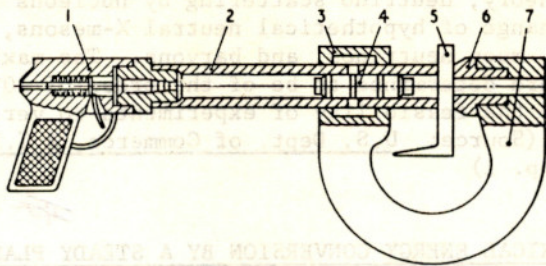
Schematic arrangement of equipment for piercing holes by explosives
